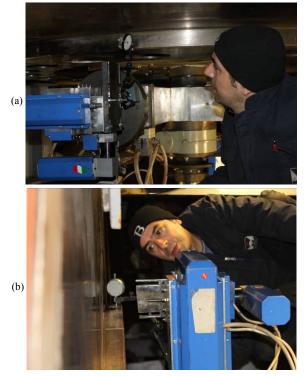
Planeness test for flange surface carried out by measure controller: a) view from below; b) side view.
